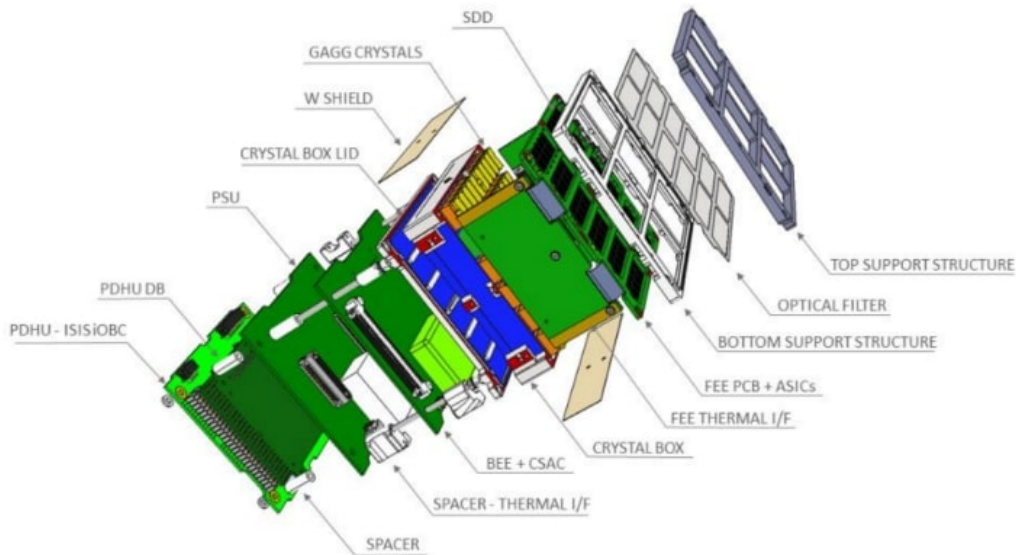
Exploded representation of the HERMES Pathfinder P/L.
